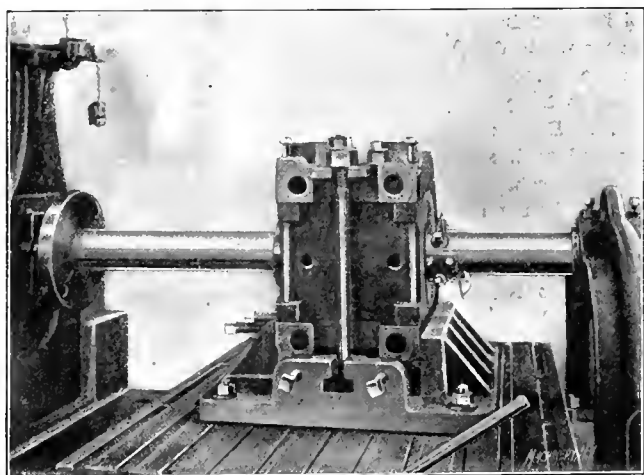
Jig for Boring Boxes on a Horizontal Boring Mill.
